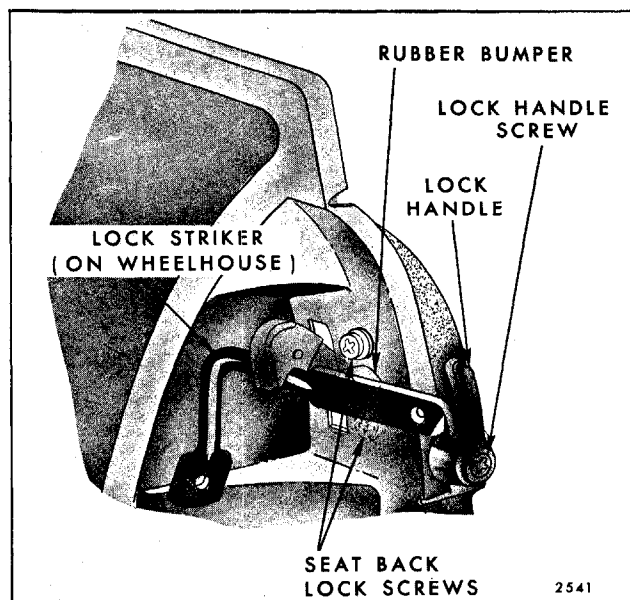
Folding Second Seat Back Lock and Striker - All "A" Styles
